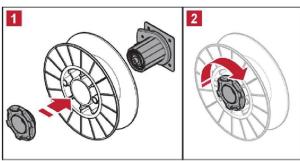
Tightening the bobbin locking nut for 100 mm (4 in.)
